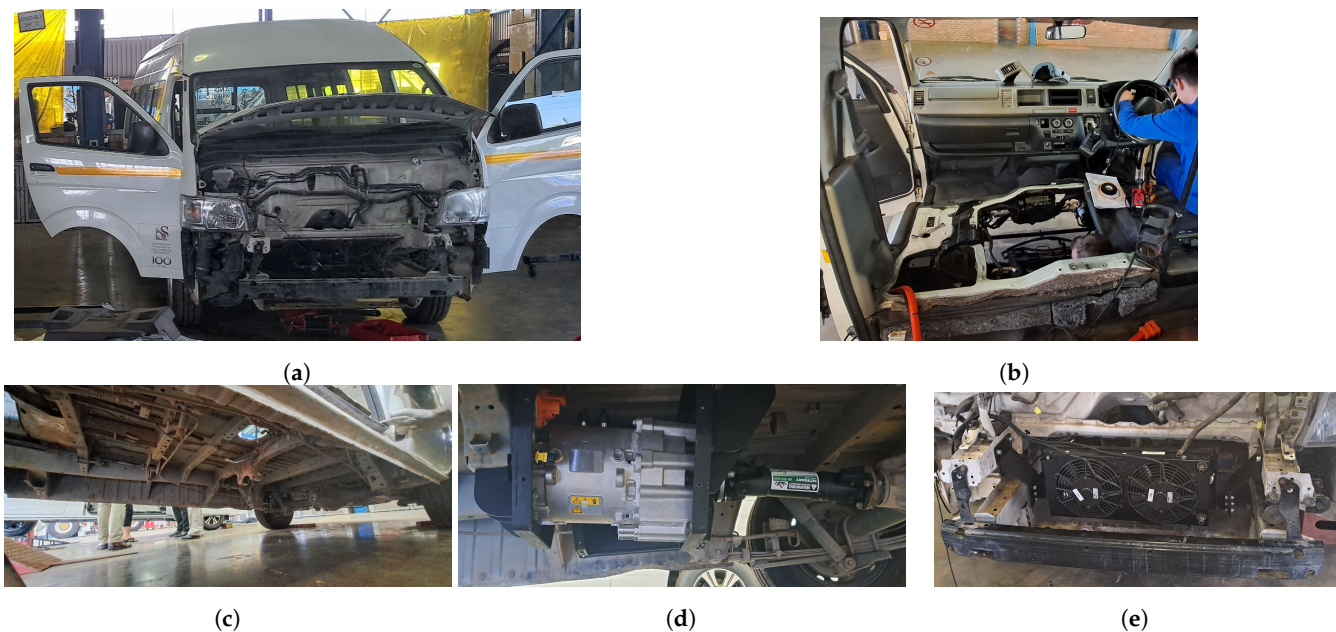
Vehicle with combustion-related components removed. (a) Front view of the stripped vehicle. (b) Empty engine compartment. (c) Bottom view of stripped vehicle before electric motor and prop-shaft installation. (d) Electric motor with prop shaft (protective cover not shown). (e) Radiator for the electric motor coolant.
